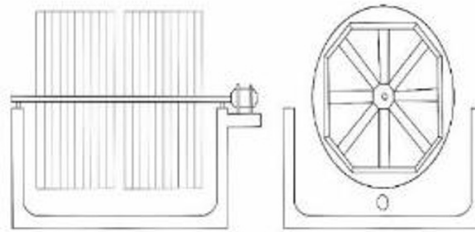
A complete rotor unit – visible are blades, spiders, through rods, shaft and bearing
